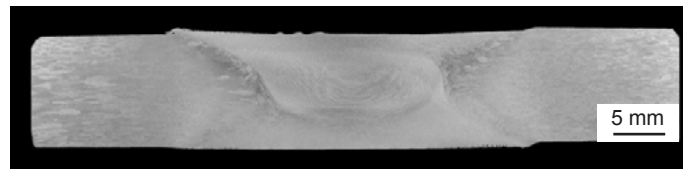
Macroscopic metallographic specimen of the FSW joint
